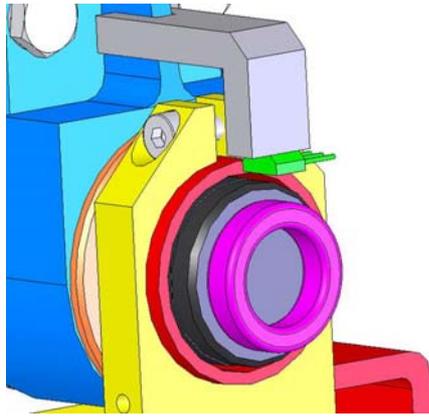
Hall sensor and ring magnet. Mechanical assembly.
